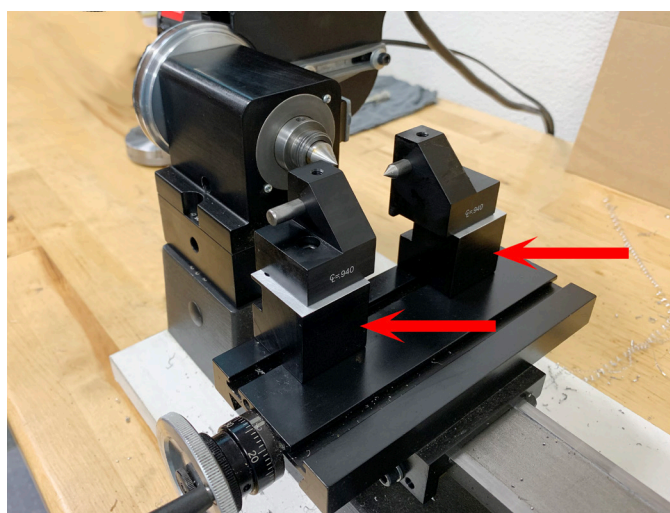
The red arrows show the modified tool posts, P/N 40180, with the Radius Cutter Supports mounted on top.
